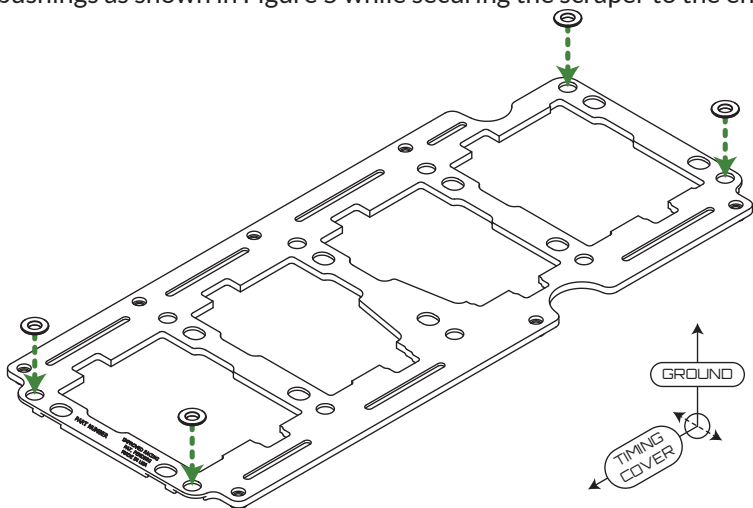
Inserting the Reducer Bushings for Factory Main Studs
